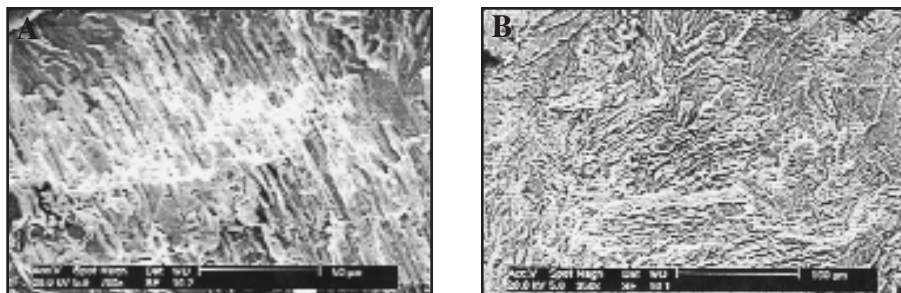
SEM secondary electron images of the tensile test fracture surfaces. A — As-received (base metal); B — as-welded conditions for TiAl. The as-received specimen shows translamellar fracture while the as-welded specimen exhibits transgranular cleavage-type fracture.
